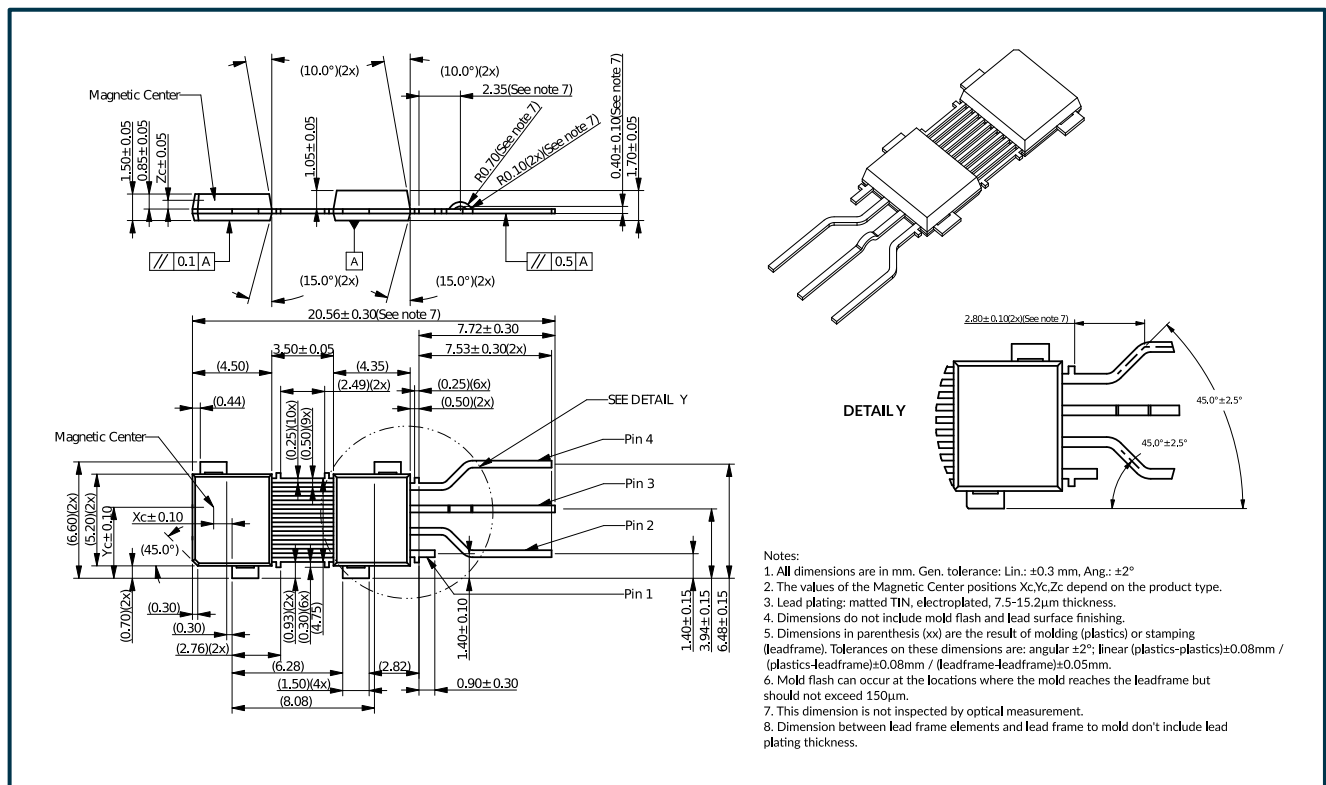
DMP-4 STD2 2.54 Package Outline Drawing
